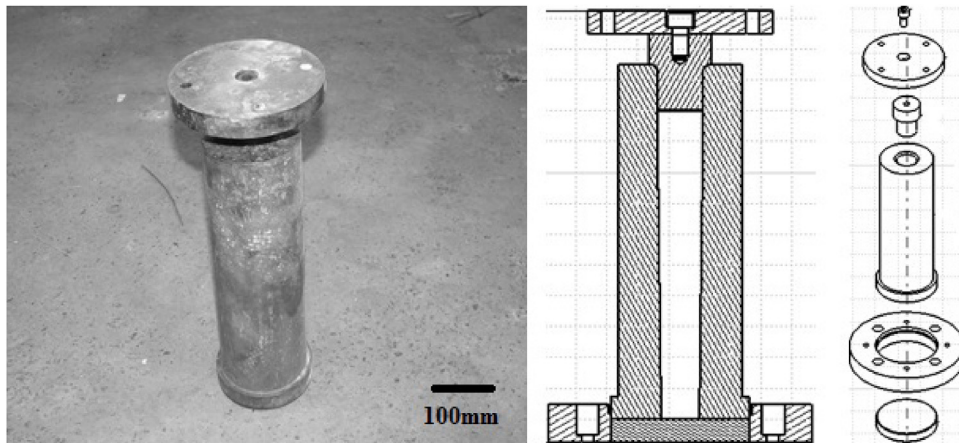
Dimensions and geometry of the mold in the squeeze casting.
